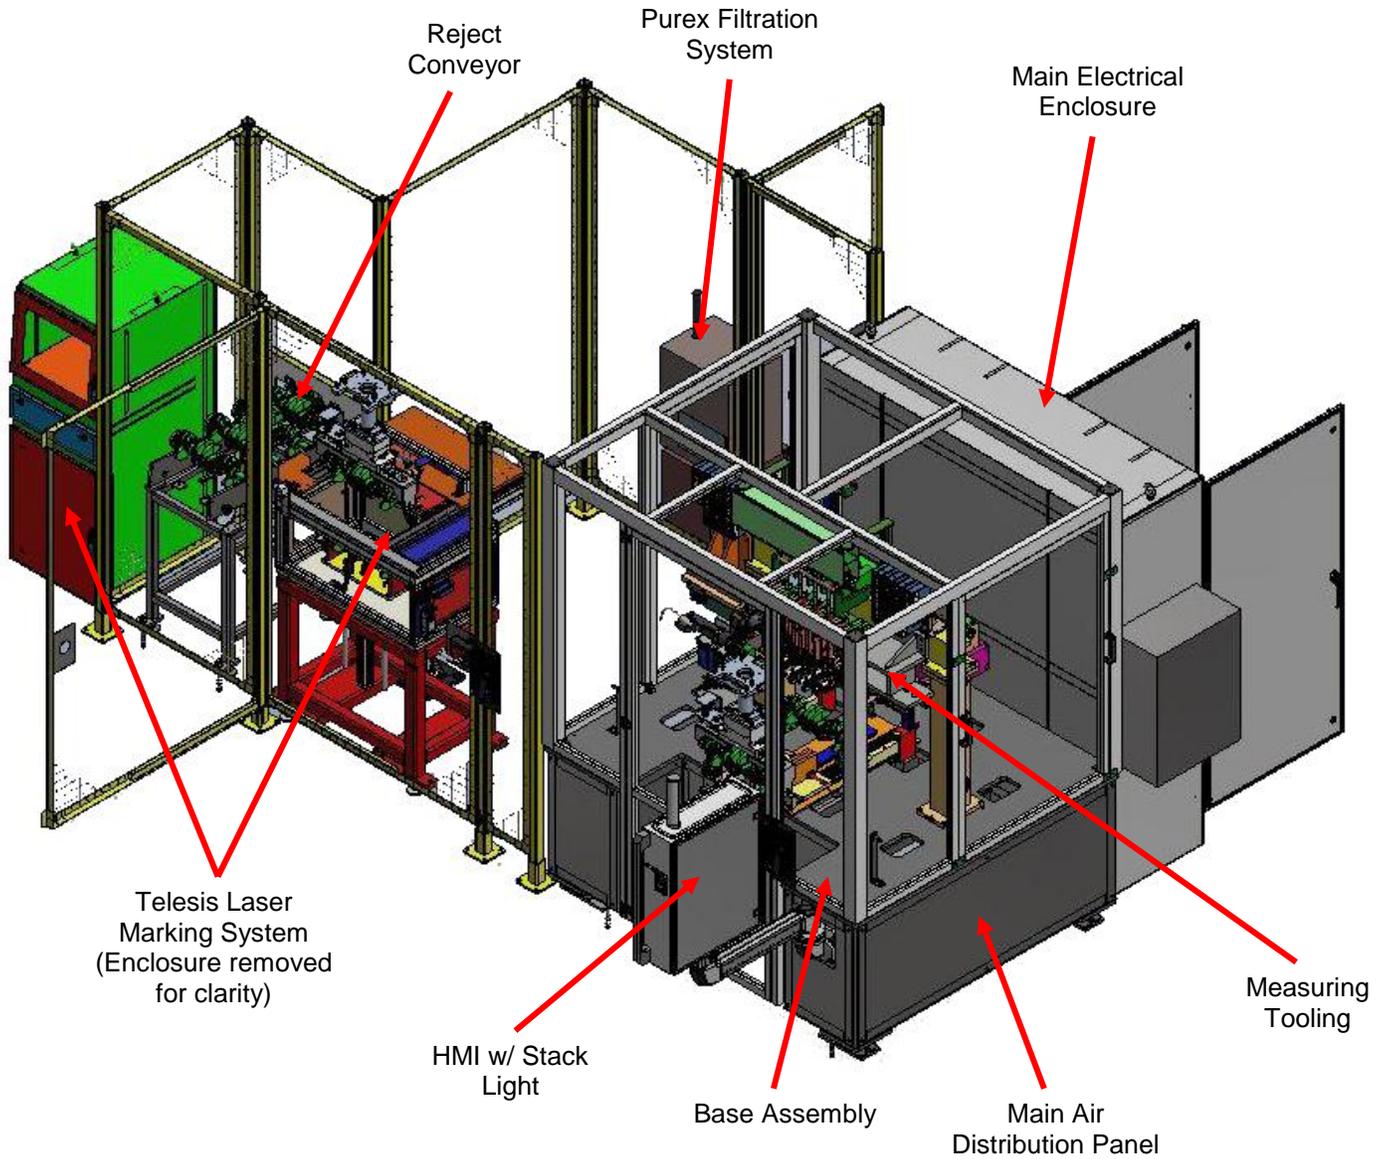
Crank Shaft Measuring Machine Station Layout
